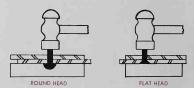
Use a riveting plate or riveting set to protect the heat of the rivet.
